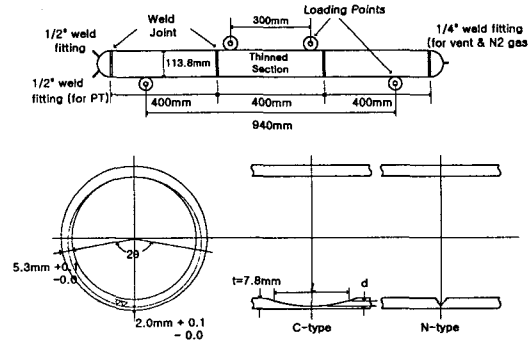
Dimensions of pipe specimen and local wall thinning shape
